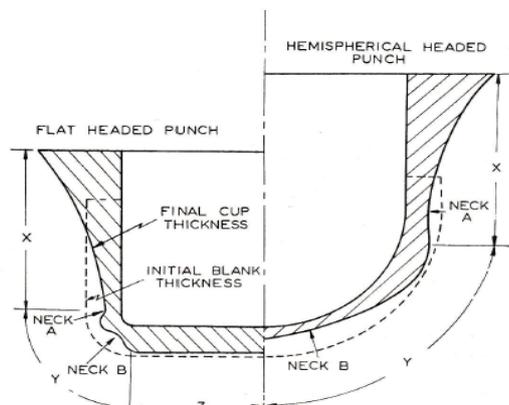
Sections through deep drawn flat ended and hemi spherical cups with flat and hemispherical-headed punches
